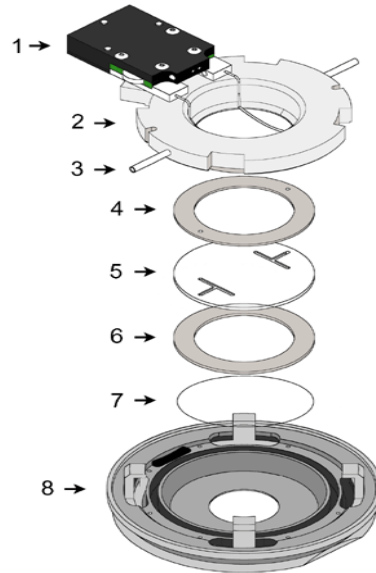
Biotech's Focht Chamber System 2 assembly.
